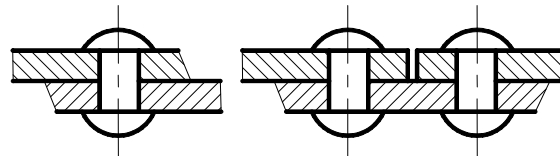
Lap rivet joint      Figure 8.7 Single strap butt rivet joint
